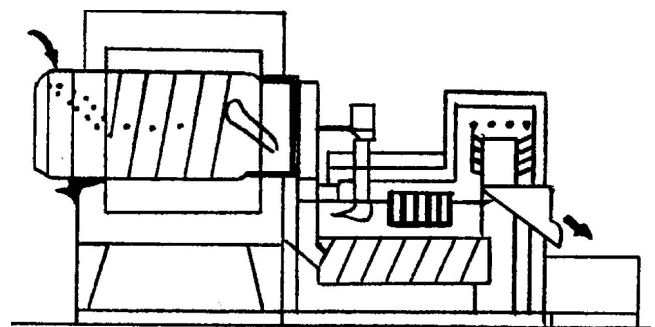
Schematic of a rotary drum screw conveyor continuous furnace.
